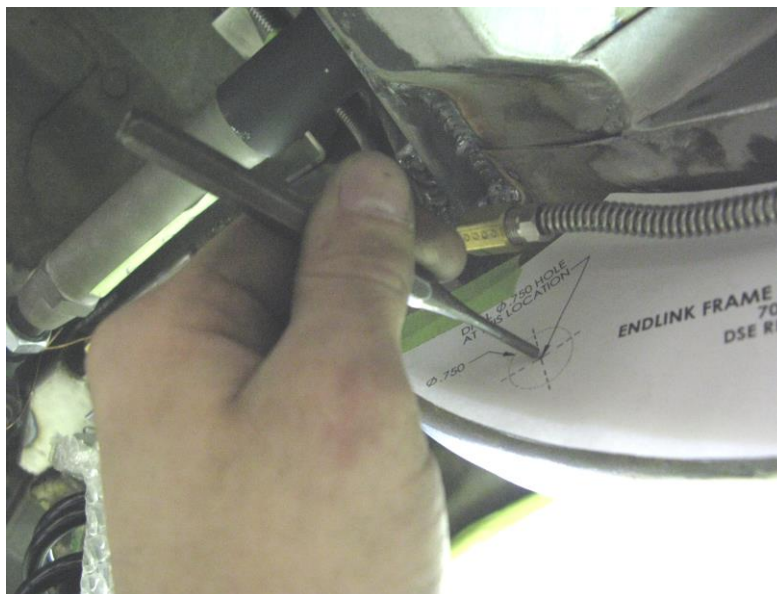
Locating and Marking the Sway Bar Mounting Hole
